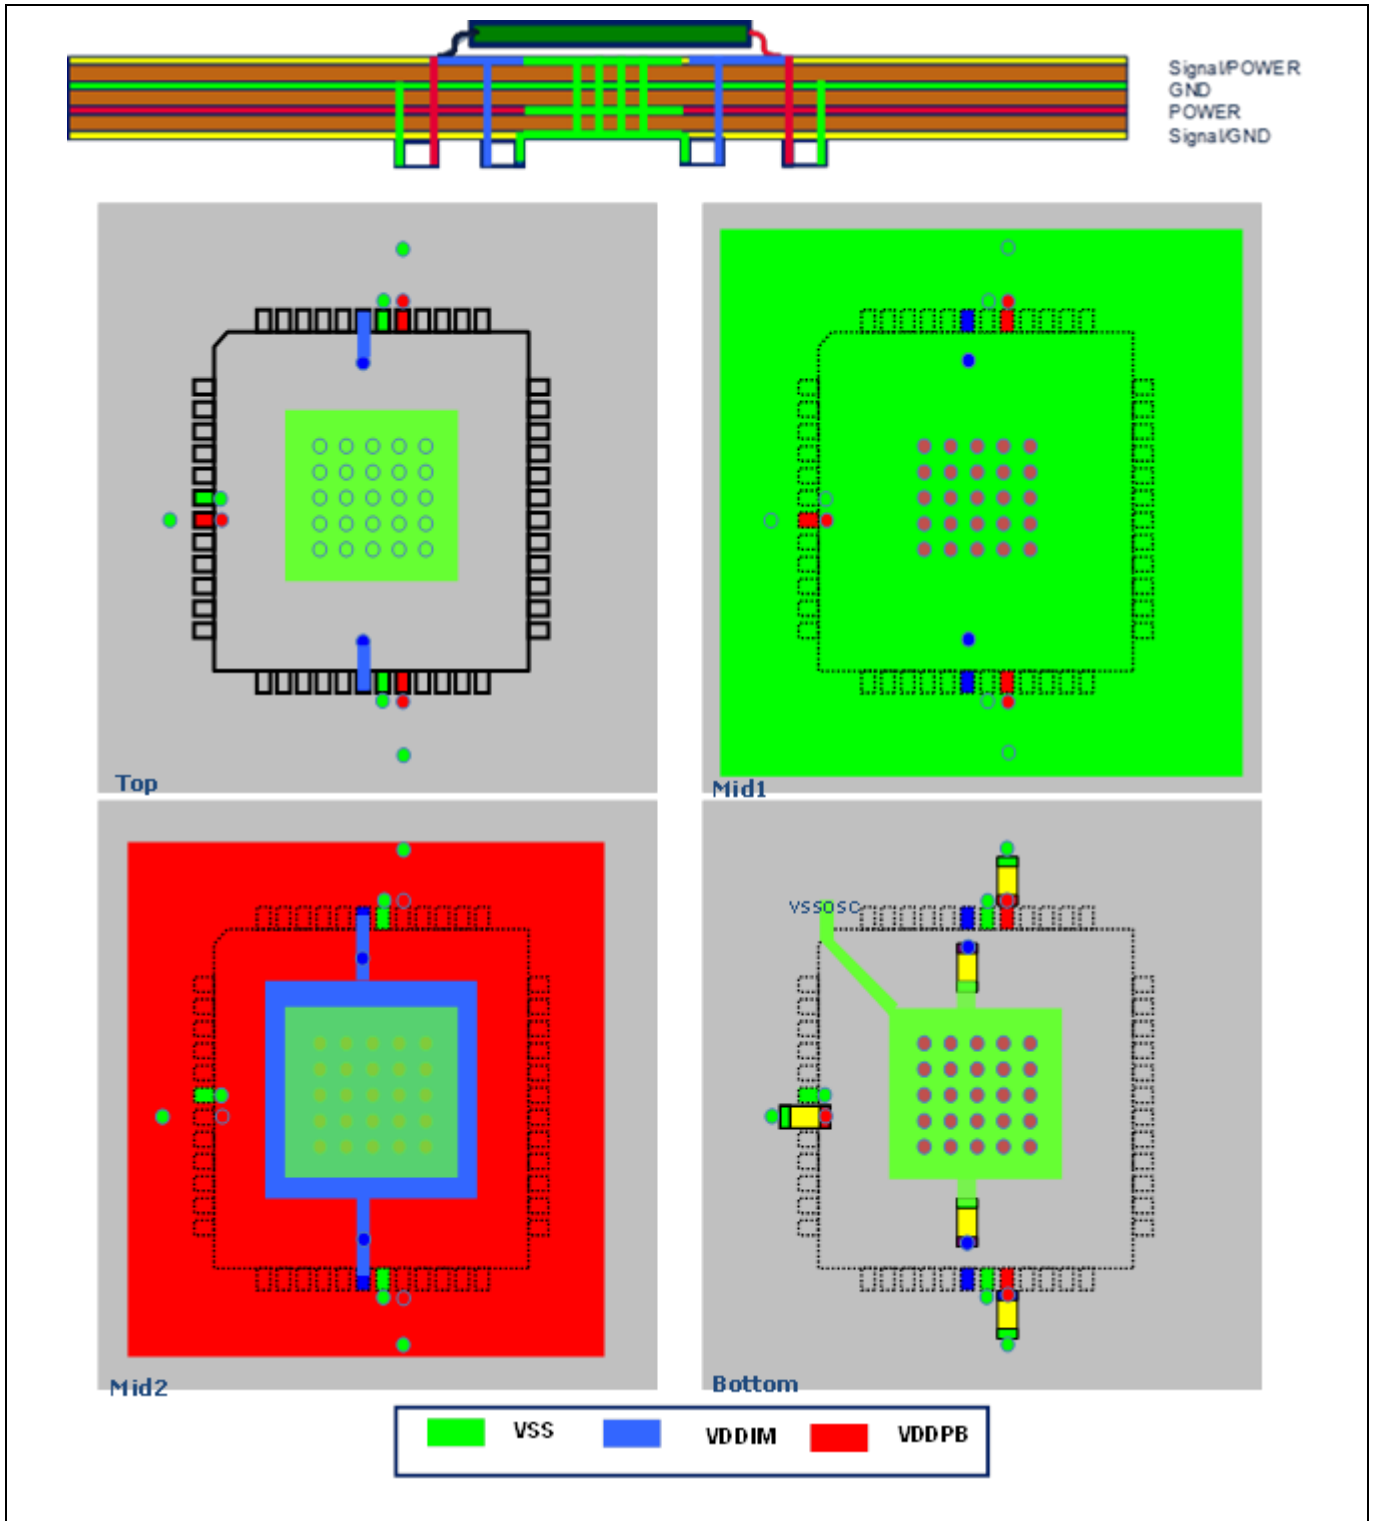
4-layer PCB layout example for decoupling of XC2000 (VQFN48-pin, double-sided placement)
